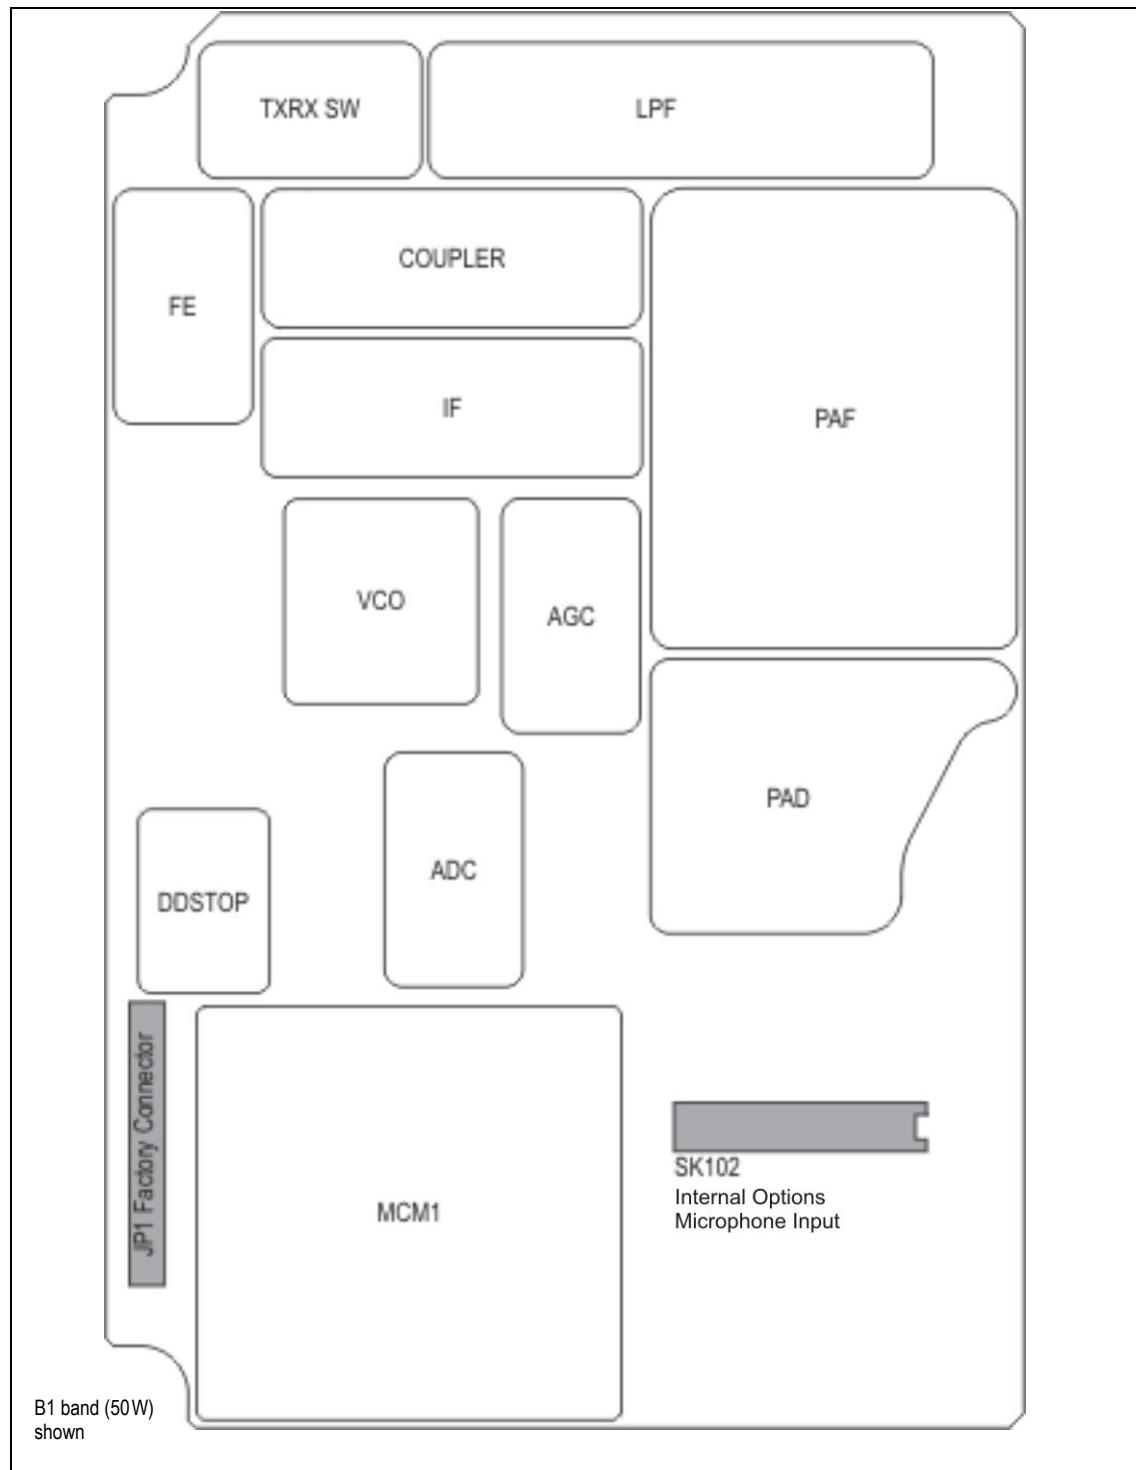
Shielding cans and connectors (bottom side of main-board assembly)
